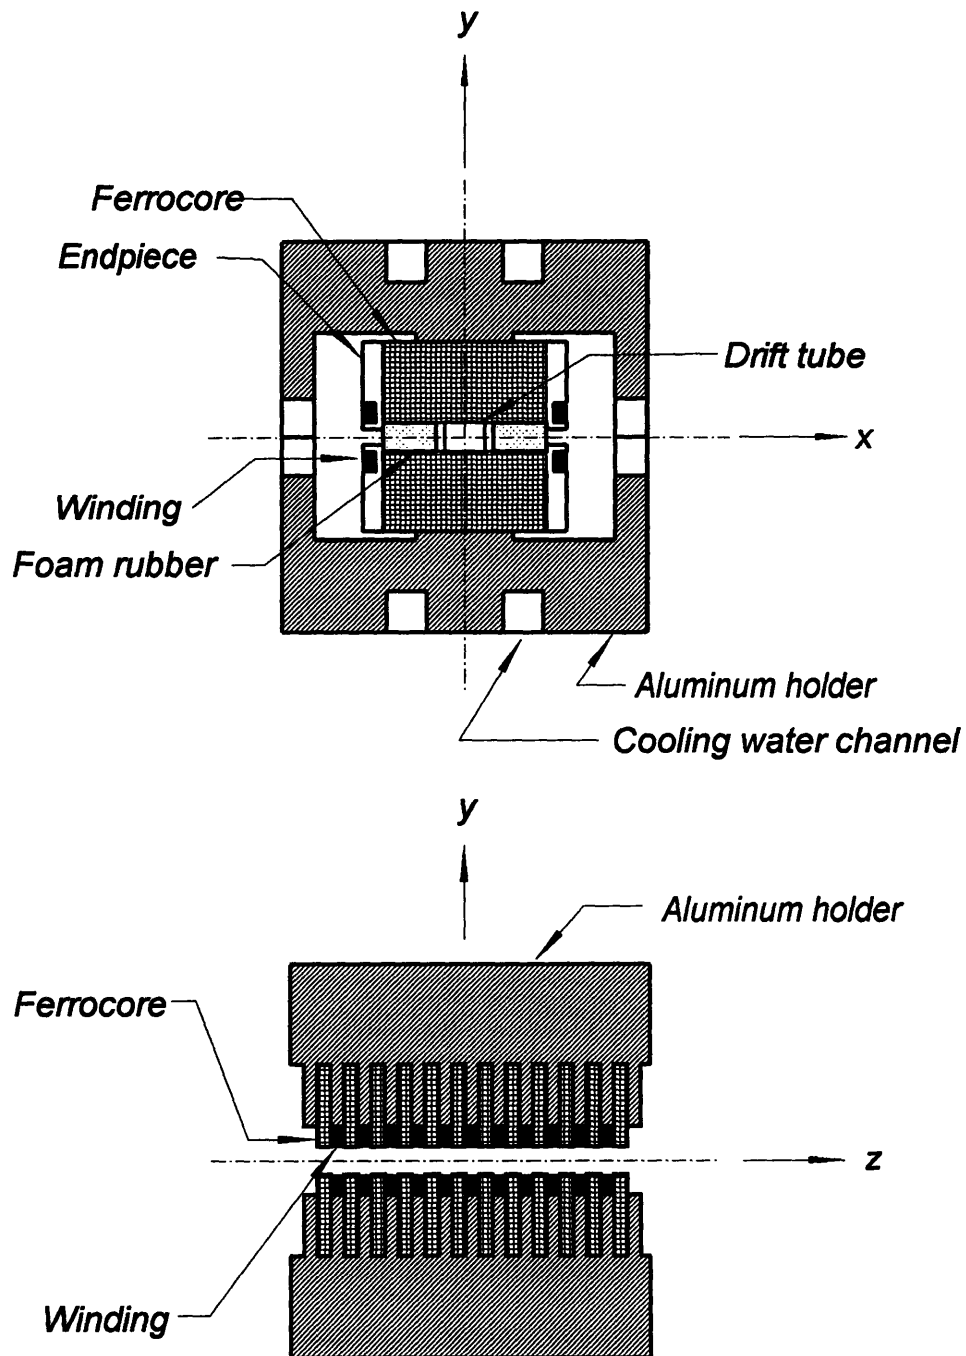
Wiggler assembly section drawings. The top view shows how the holders, coils, and drift tube are assembled. The bottom view illustrates the installation of the coils into the aluminum holders.
